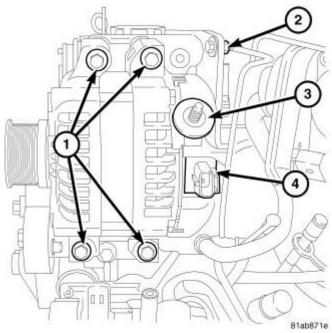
GENERATOR Courtesy of CHRYSLER LLC
